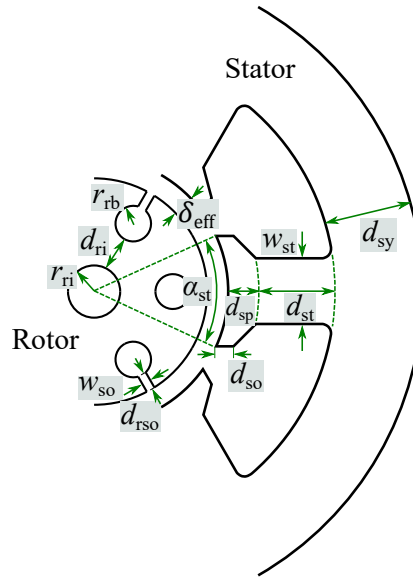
Geometric parametrization of a squirrel cage induction machine.
